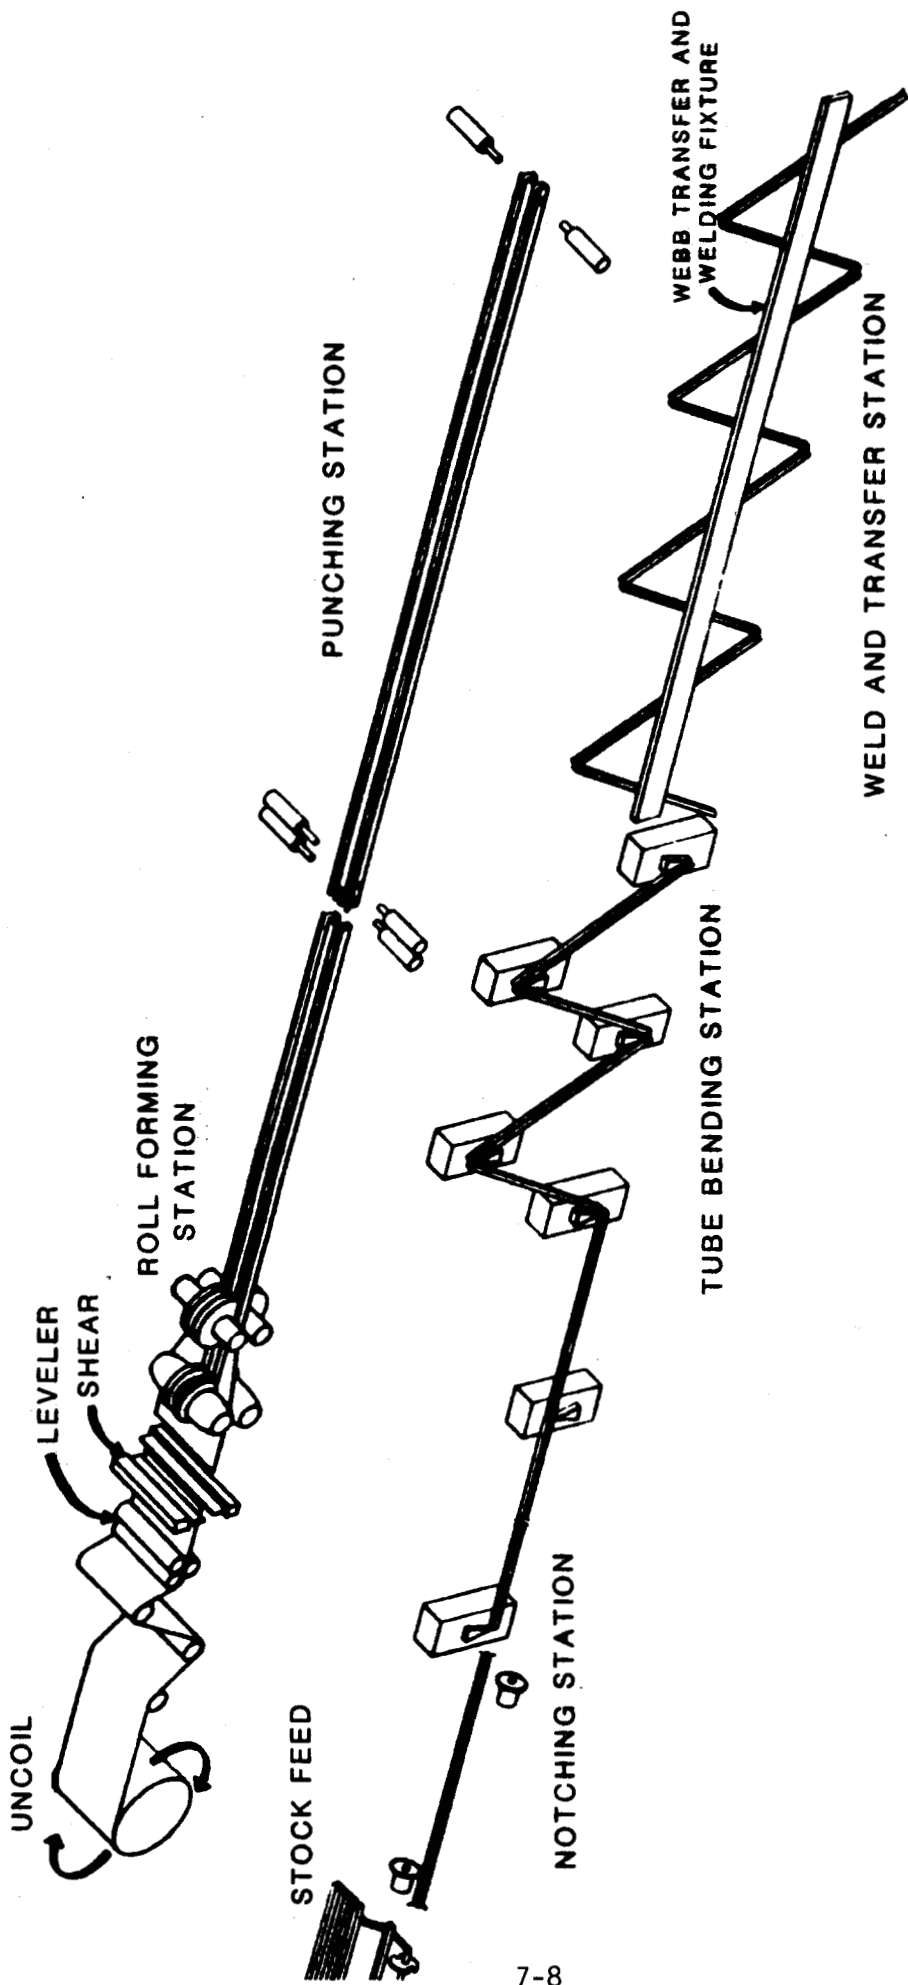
TRUSS FABRICATION - COIL LINE
